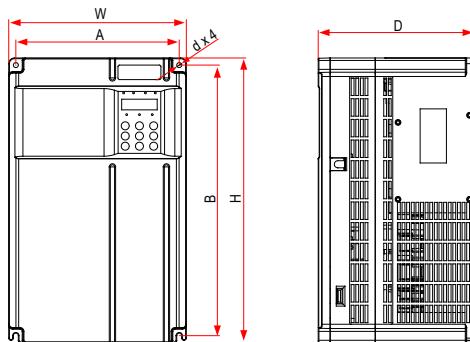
Outline dimensions and installation dimensions of 18.5-37 kW AC drive models
